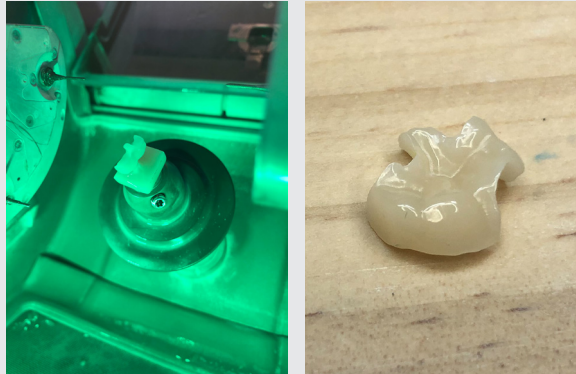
Vita Enamic Block was machined using a Cerec MCXL (Dentsply Sirona) milling machine. For complex onlay restorations, it took about 15 minutes. Image of the polished restoration after removal of the sprue.
